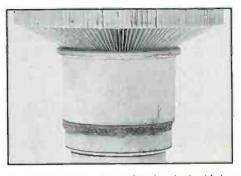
Note the burned and melted grid ring near the base of the tube. Failure was caused by poor contact between the grid ring and socket.
